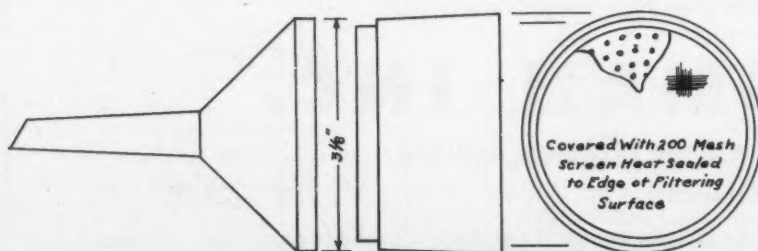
Modified California State Buechner funnel, 2-piece polyethylene.
